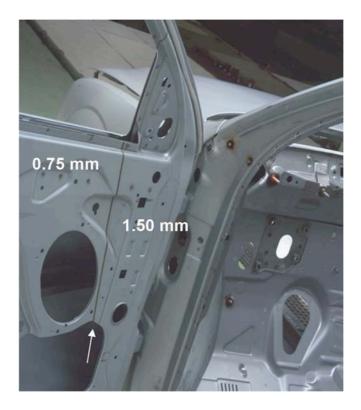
Ford Mondeo front door inner with single straight weld
